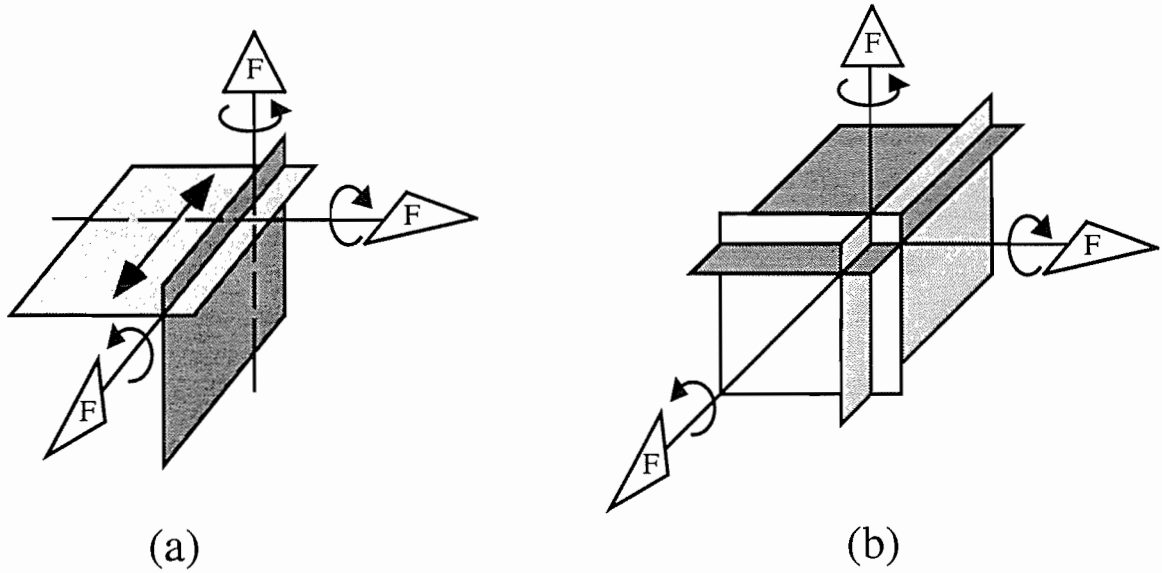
(a) A two plane fixture (b) A three plane fixture
